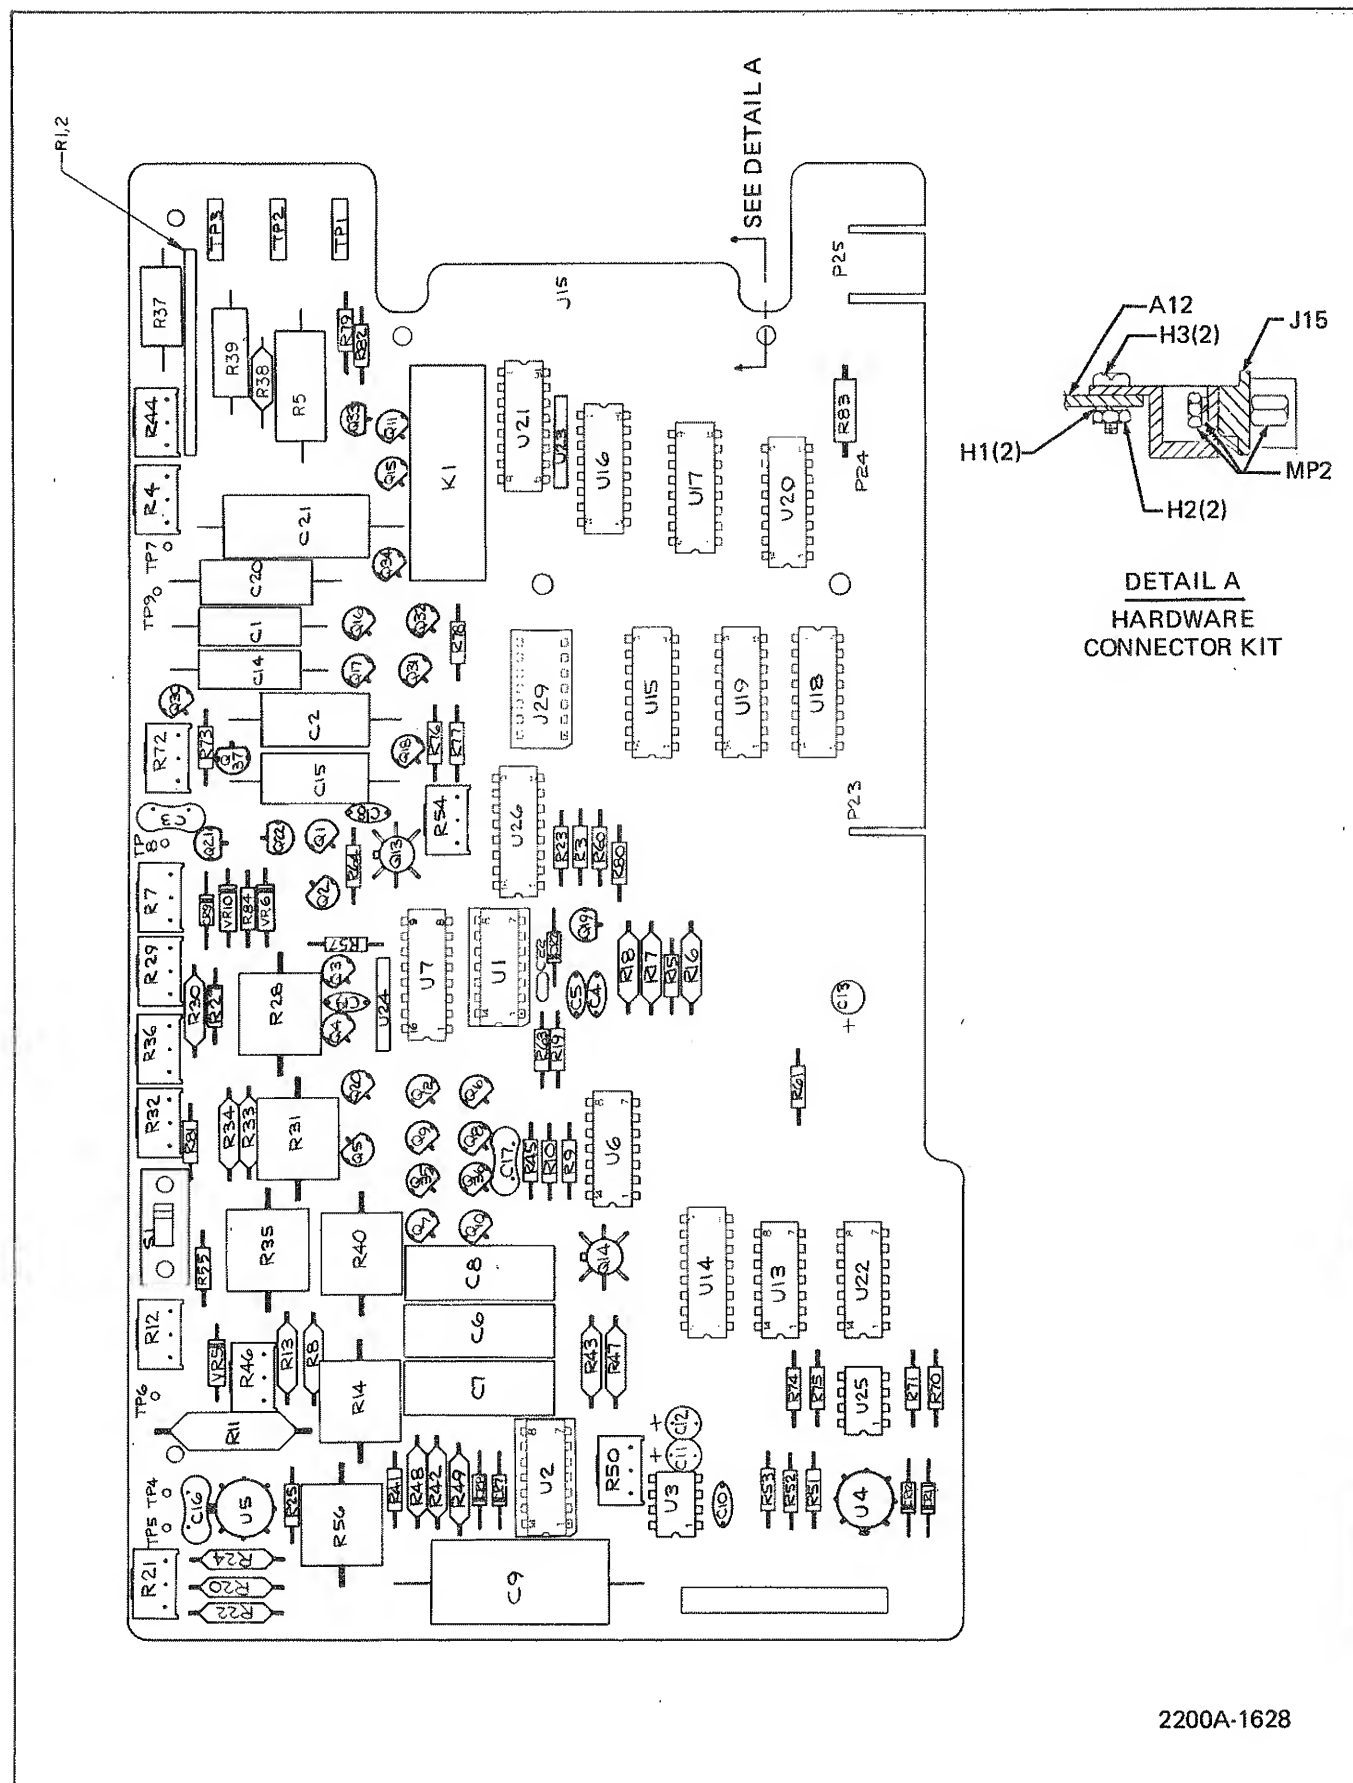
A12 High Performance A/D Converter PCB Assembly
